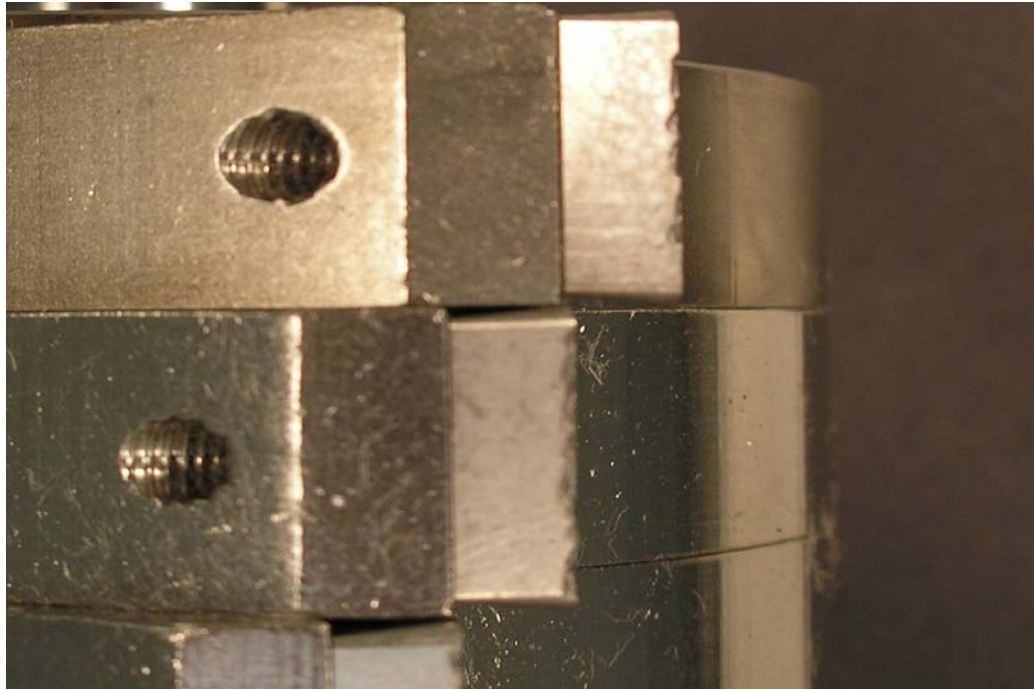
Blades of knife-cutter after grinding electronic samples. Note chipped edges.
